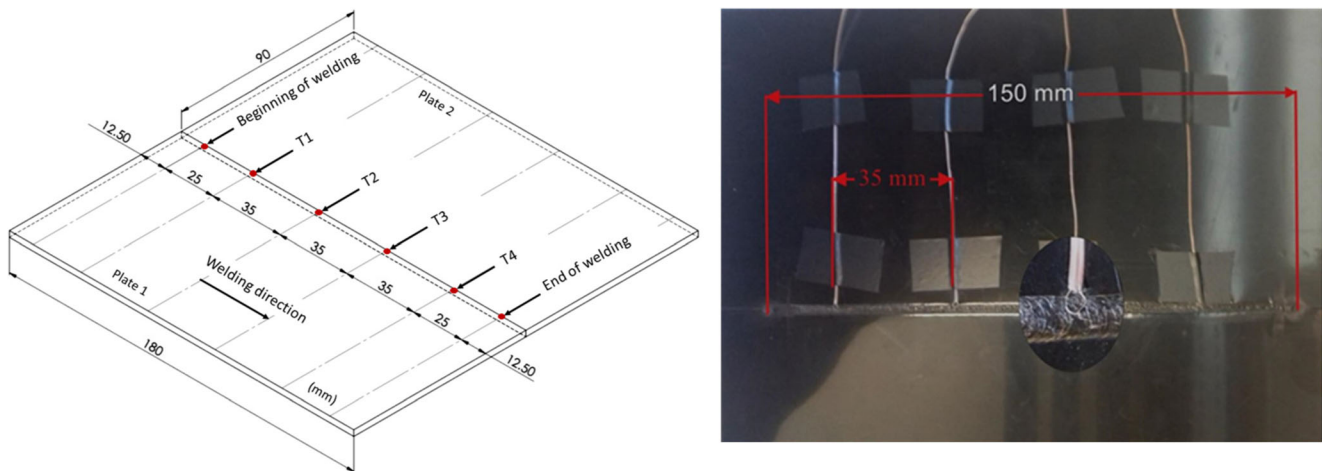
Thermocouples position underneath the weld bead. a 3D drawing. b Welded plate
